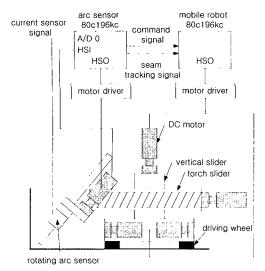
Block diagram of high speed rotating arc sensor system and welding mobile robot
